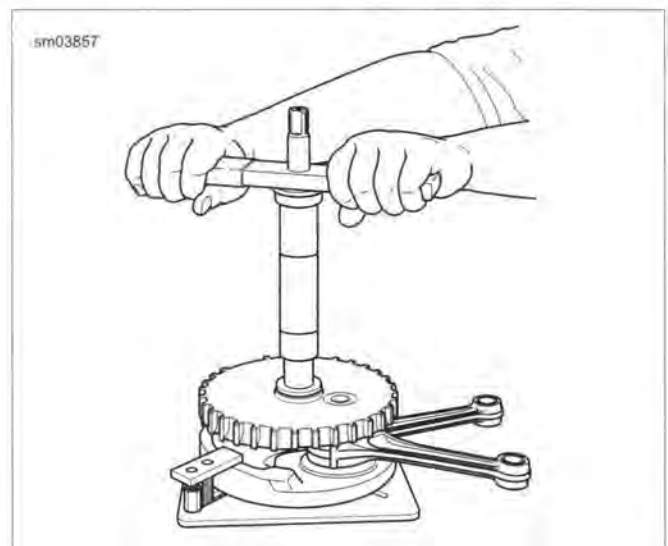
Press Inner Race onto Sprocket Shaft: Operation
